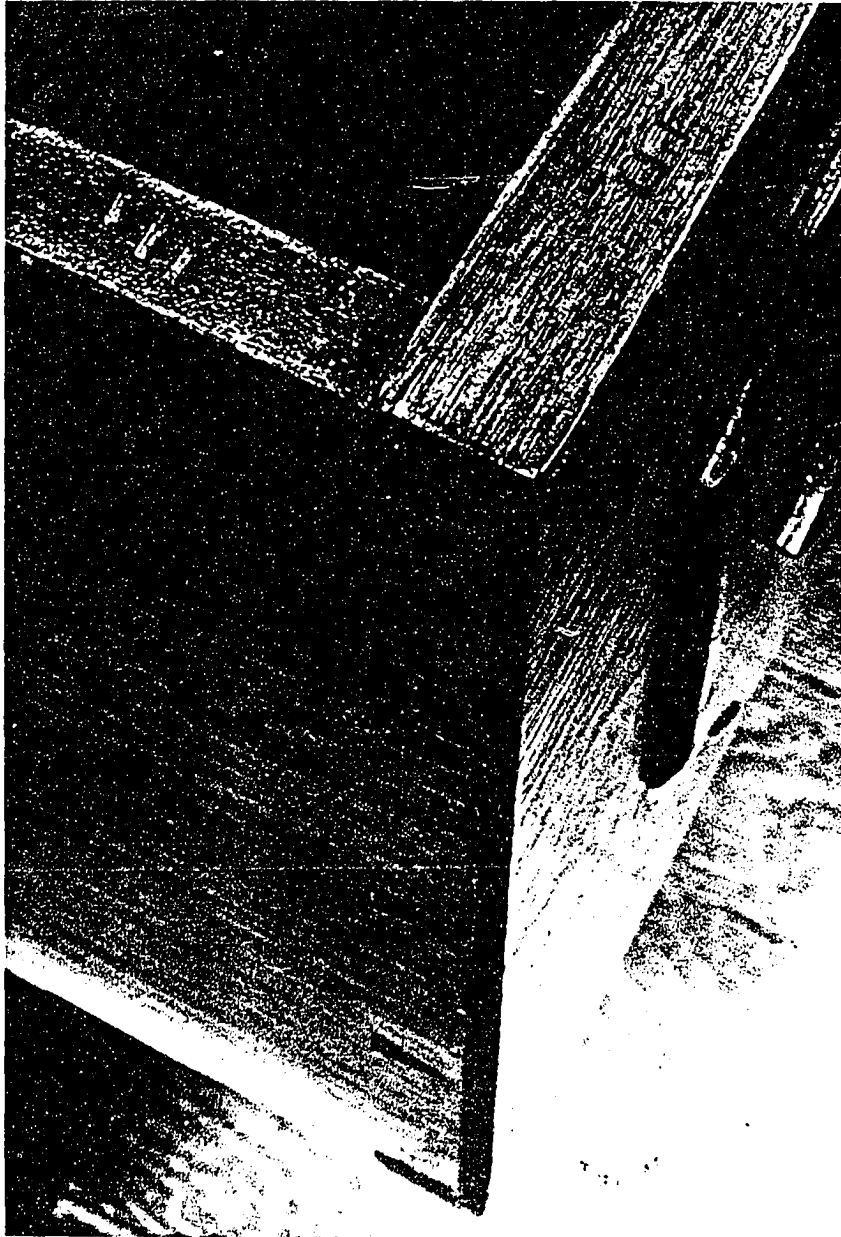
Chisel marks used by Kersh to align drawer parts during assembly. Glick dresser, bottom (third) drawer.
